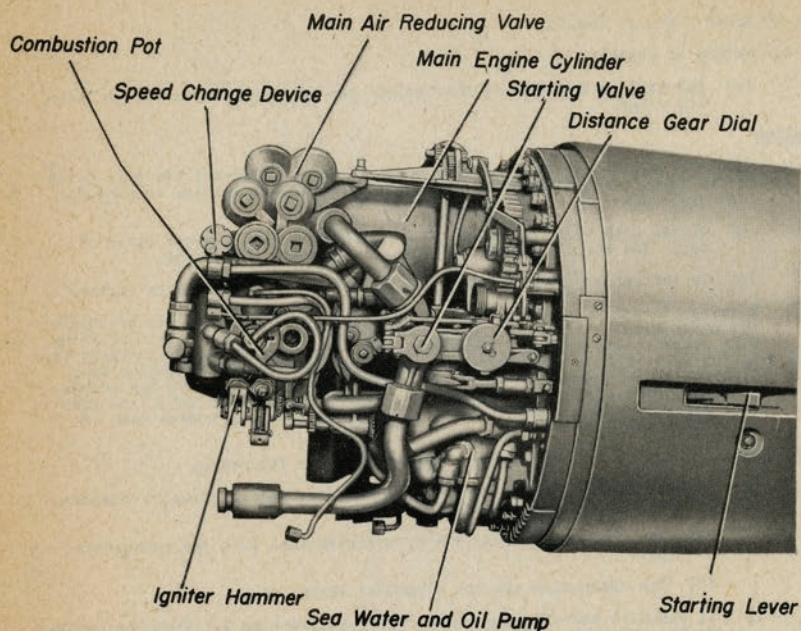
Torpedo Type 93 Model I Mod 2, Engine, Top View
